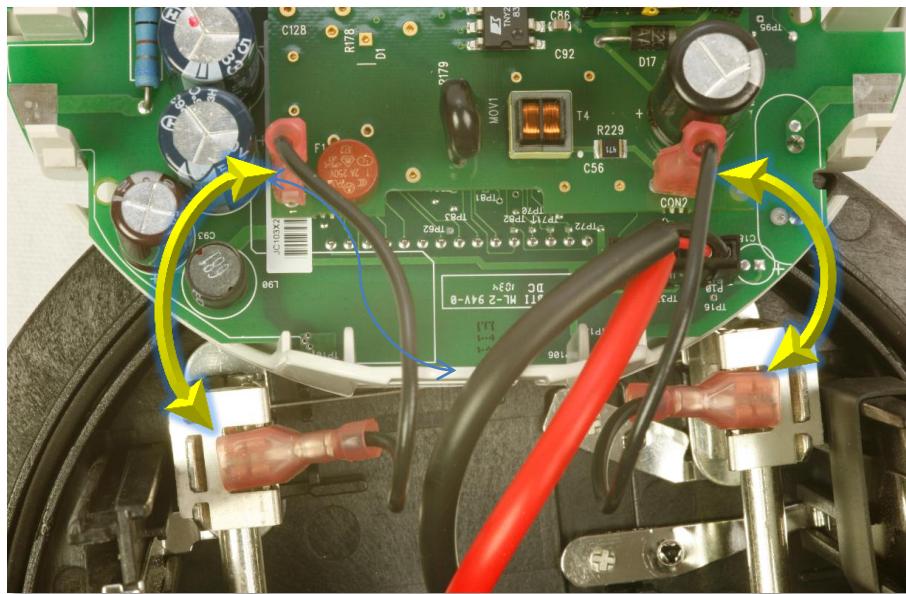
Meter PCB connector pins correctly installed through the gateway PCB connector block
